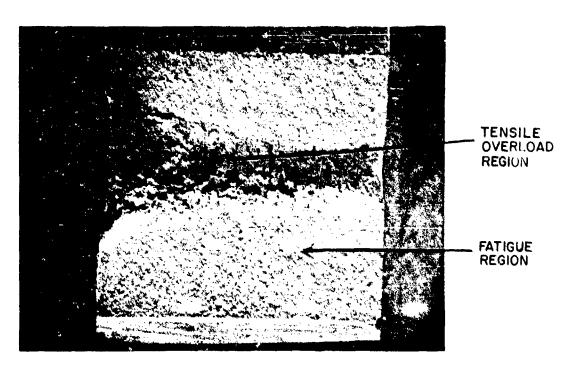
Fatigue fracture surface of hydrogen-embrittled A-516 steel, 12x.
